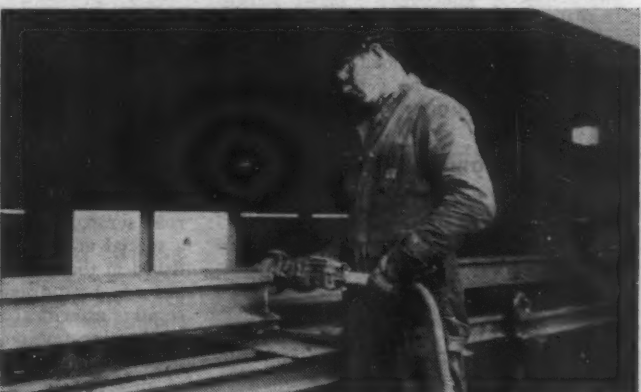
Portable Hand Grinders Are Used to Finish Rail Ends After Torch-Cutting
